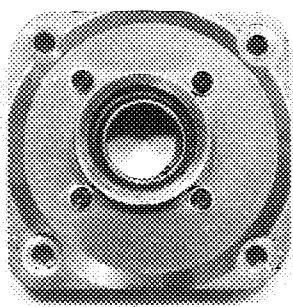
TOP MOUNT REINFORCEMENT - REAR.
